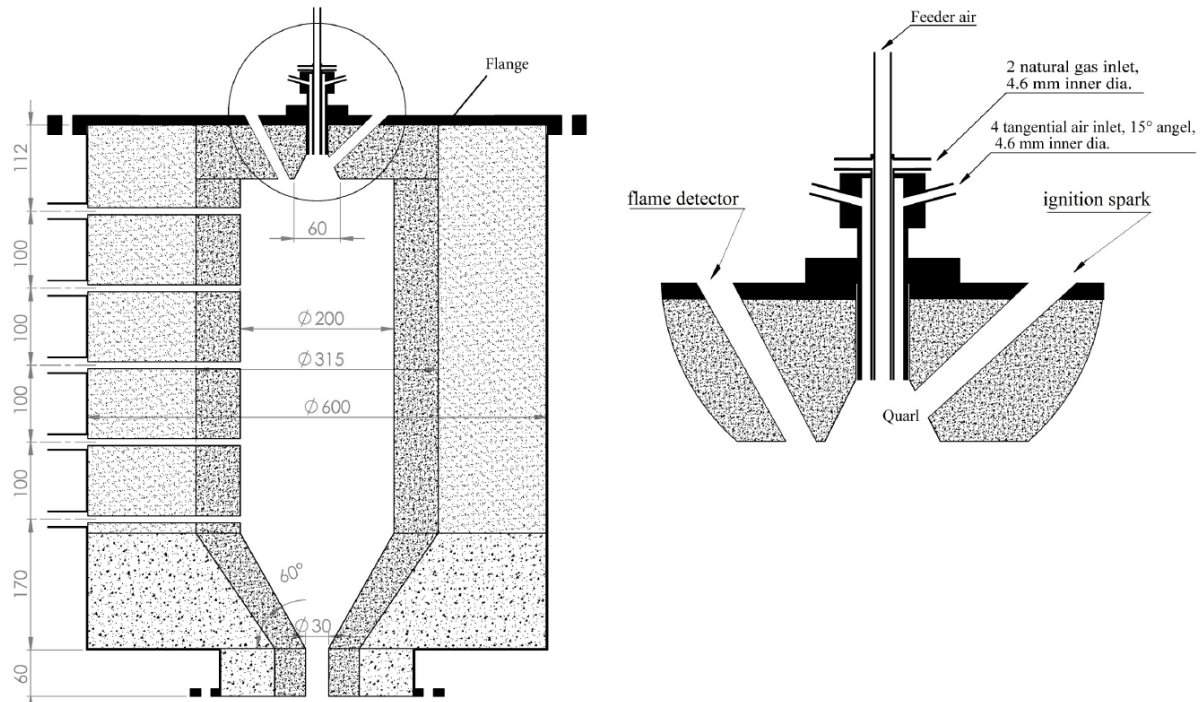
Illustration of the gas burner, (left) Full combustion chamber (right) swirl burner assembly (from [142])
